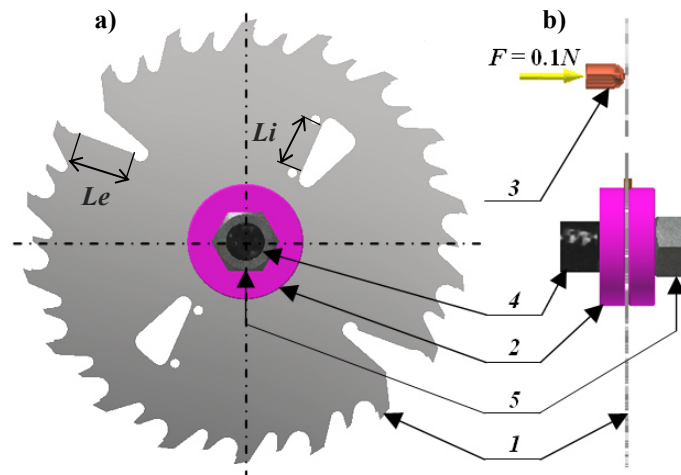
Model of the testes circular saw blade *PI* (a) with side view (b), where: 1 – circular saw blade, 2 – clamping collars, 3 – inductor with applied force, 4 – grounded shaft, 5 – clamping nut, L_e – length of the external cleaning knives of circular saw blades, L_i – length of the internal cleaning knives of circular saw blades
